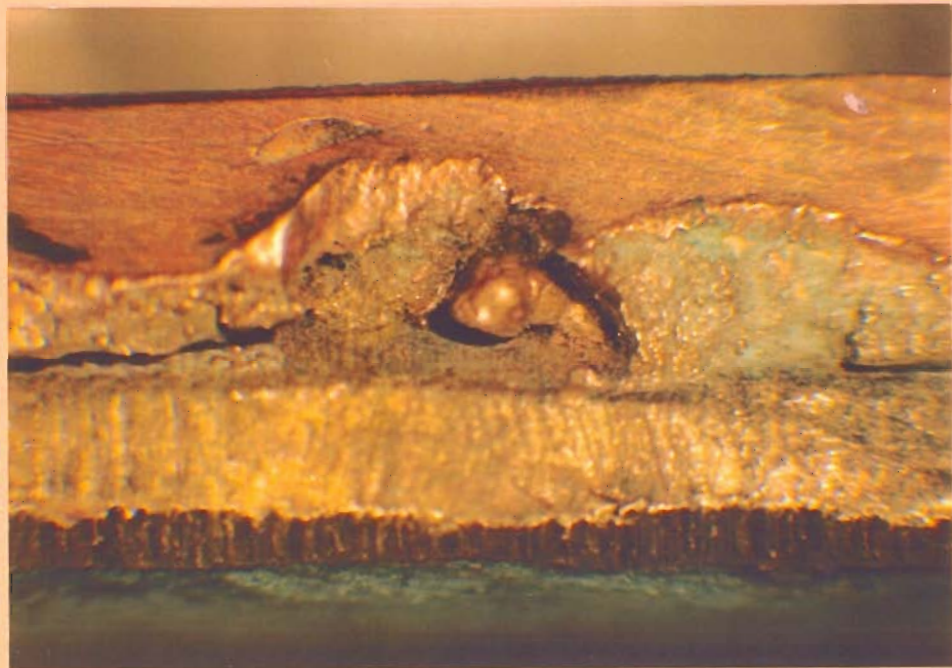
Close-up of Defects in Circumferential Weld
